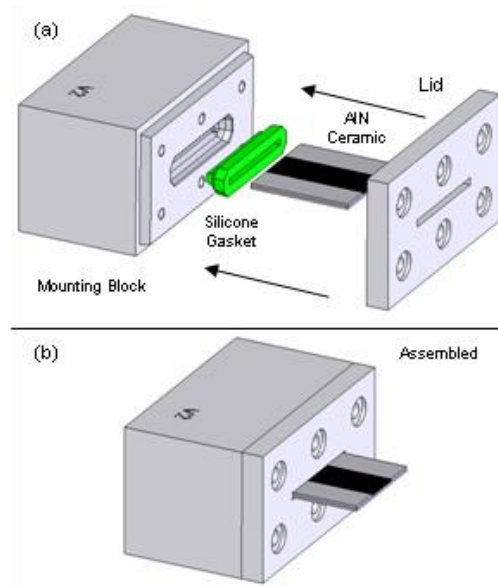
Mounting block for AlN saw-cut microchannel coolers (a) pre- and (b) post-assembly.
